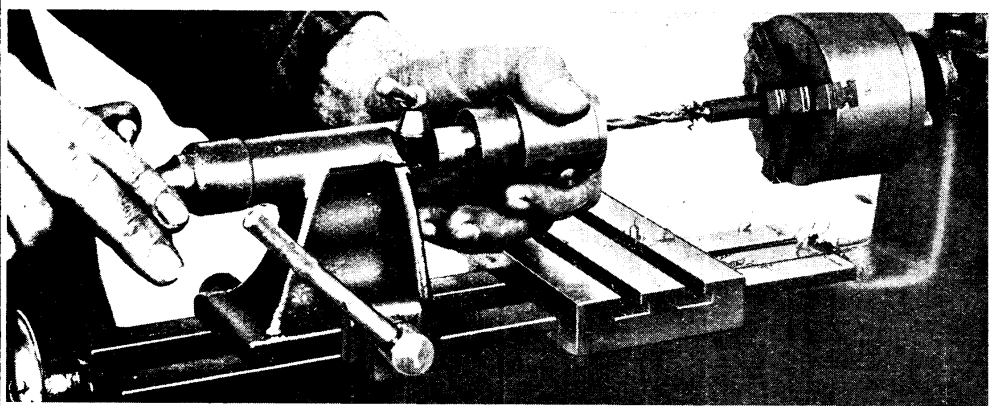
Ebonite rod in the chuck on the head stock of a lathe, the chuck on the tail stock holding a drill. By this means an ebonite bush is made to any dimension desired. The drill should be driven at high speed and fed slowly into the work
